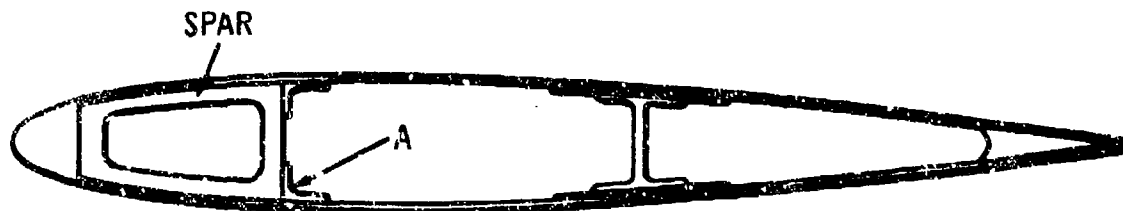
Typical Rotor Blade Design — Alternate 2
